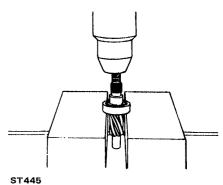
Pressing pinion bearing out of pinion shaft
